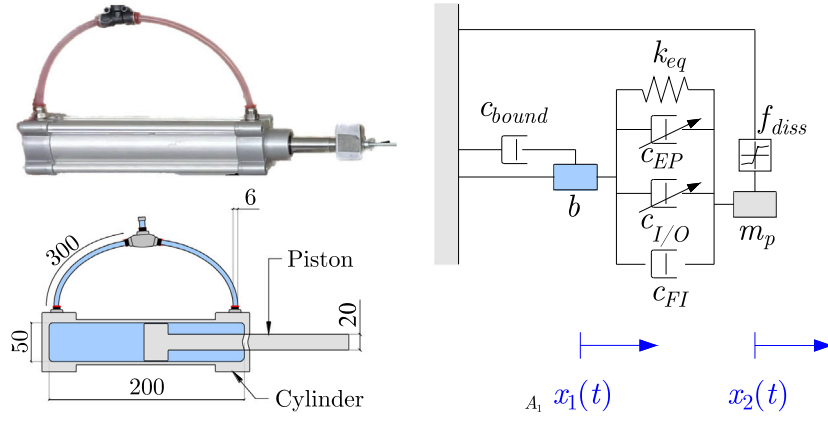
Photo, sketch and mechanical model of the real fluid inerter [40] (dimensions in millimeters).
